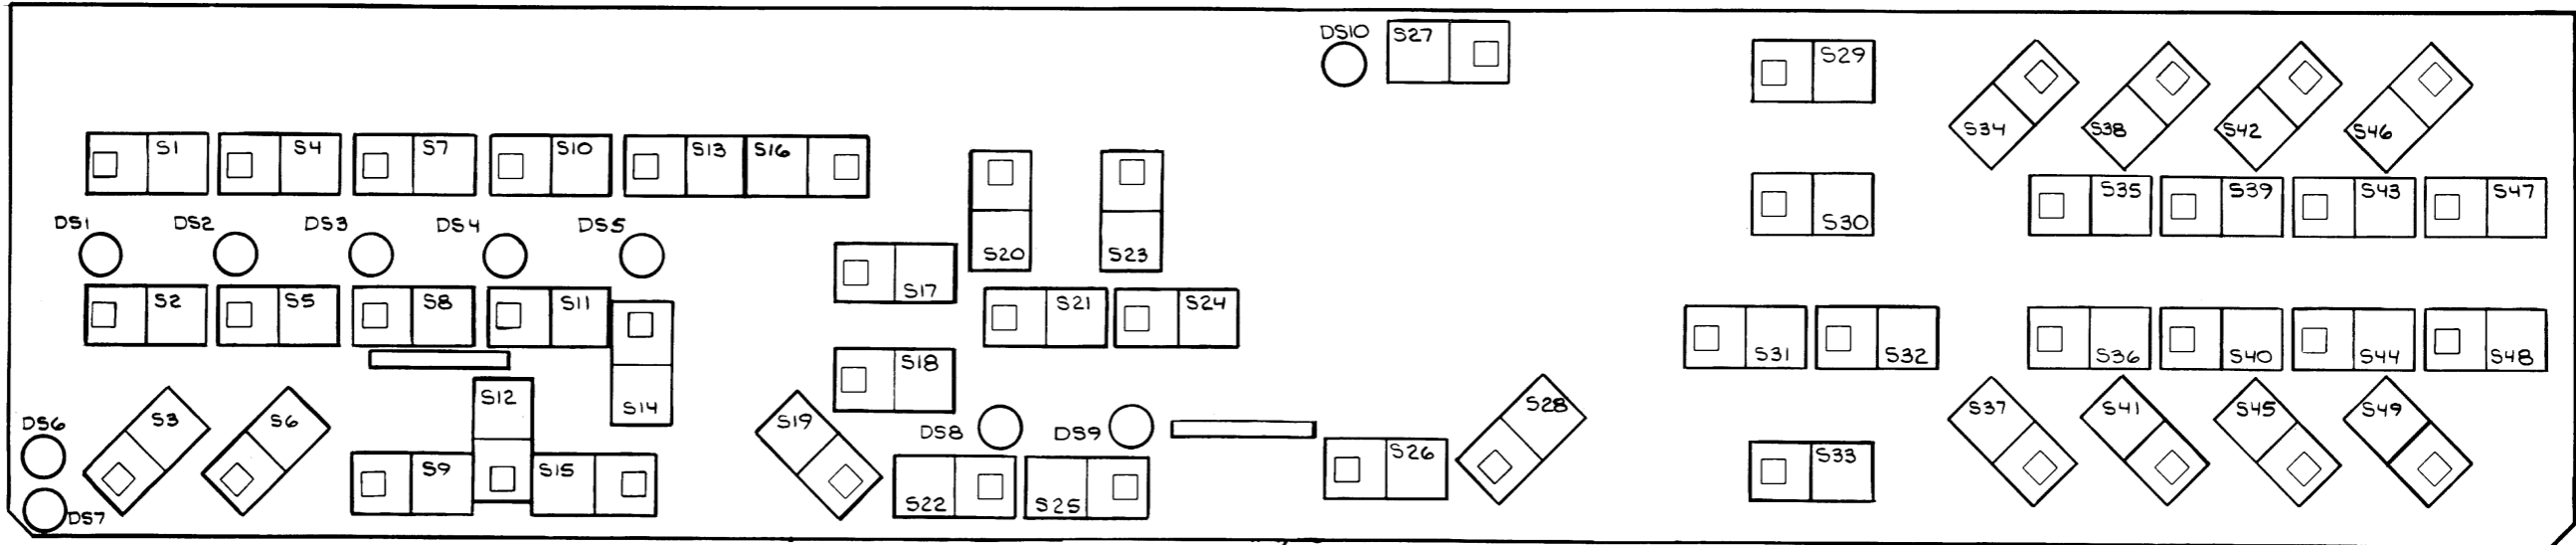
A5 Front Panel, Assembly and Component Locations
